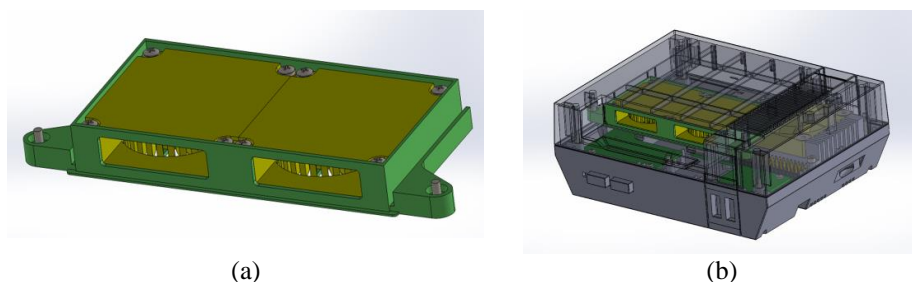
(a) 3D model of assembly of carrier and centrifugal fans, (b) 3D model of whole assembly [8]
